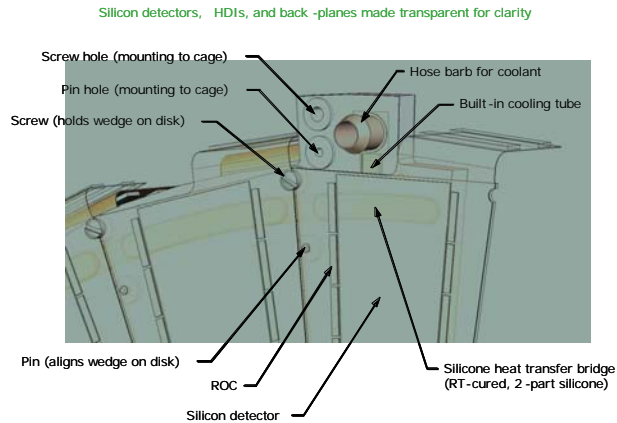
Exploded view of the disk showing the series of alignment pins on the outer and inner radius. The alignment pins accurately locate the wedges on the disk.
